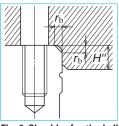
Shoulder for the rail datum surface Fig. 6 Shoulder for the ball slide datum surface
